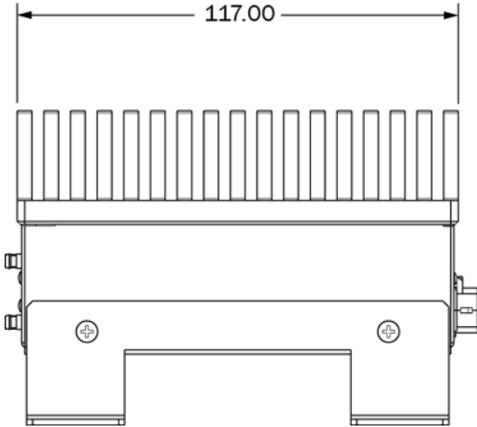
CL-Ten Dual Medium External Frame Grabber Enclosure - Back View
